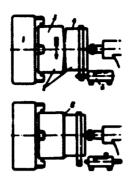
Friction welding: 1) Holding device; 2) components to be joined; 3) rotating component; 4) fixed components; 5) stop; 6) welded joint.
